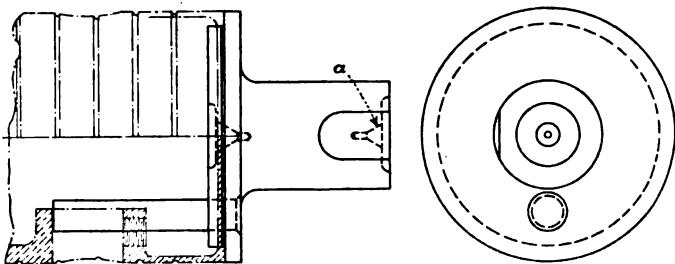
FORM OF CENTER ORIGINALLY USED IN THE PACKARD SHOPS FOR CENTERING AND DRIVING THE PISTONS DURING THE EXTERNAL GRINDING OPERATION
